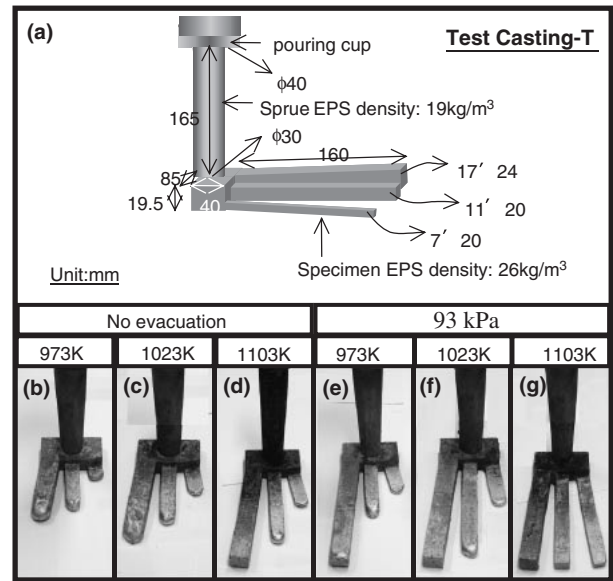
(a) The shape of the Test Casting-T manufactured by lost foam casting (unit:mm); (a) dimension of casting; (b)–(g) shape of each casting for AZ91H alloy under various casting conditions.
